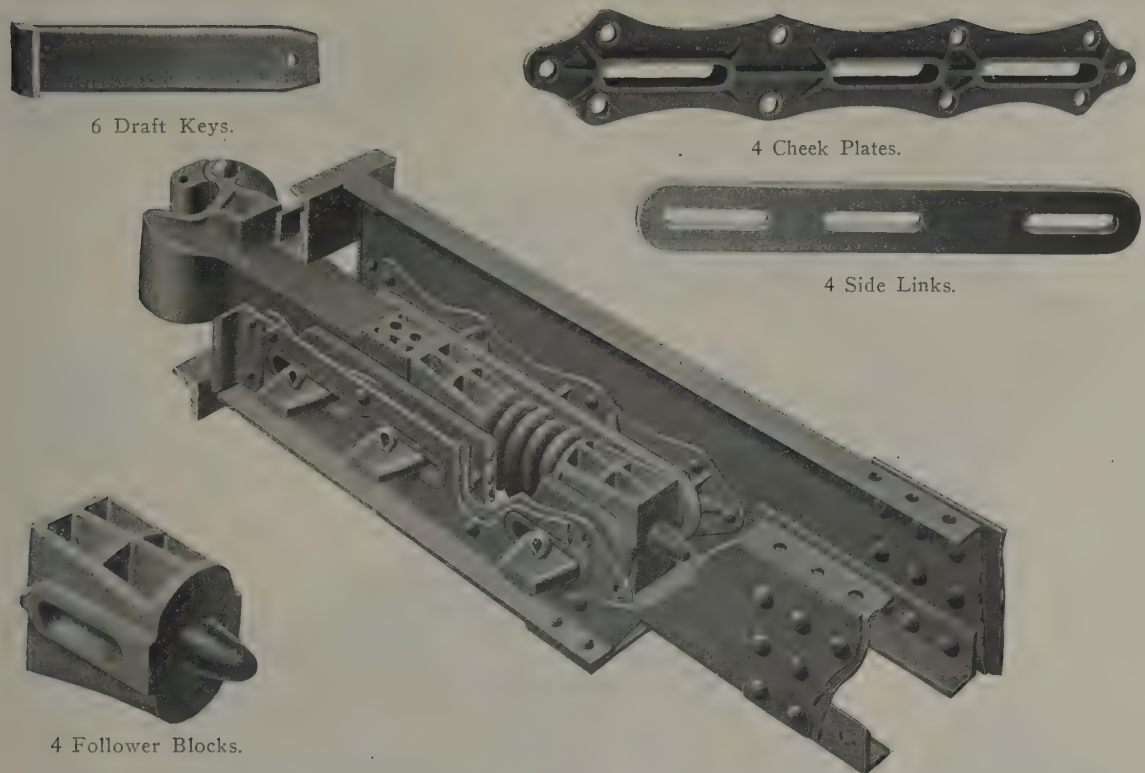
Farlow Three-Key Draft Attachment for Use with M. C. B.  $6\frac{1}{4}$  in. by 8 in. Single Spring, and Parts for One Car, as applied to Light Capacity Cars for Export.
